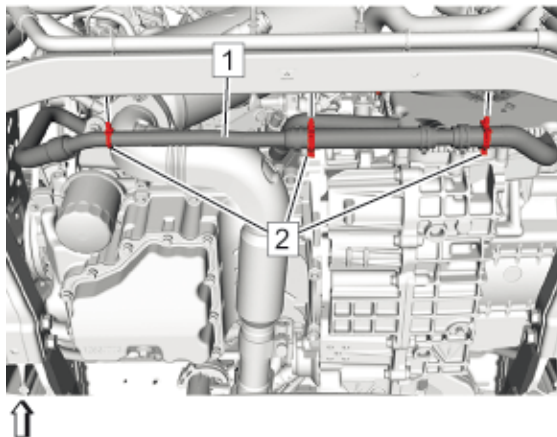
Heater Water Auxiliary Pump Inlet Hose And Clamps
